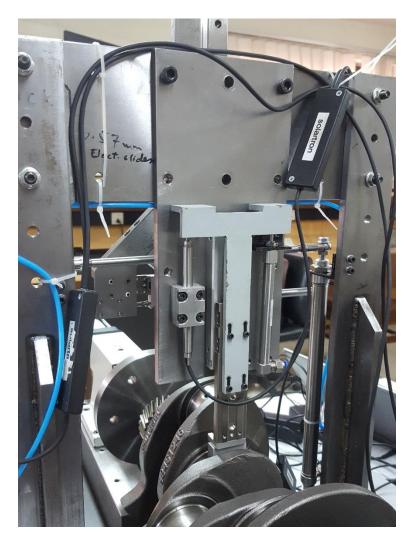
MANUFACTURED RUNOUT ASSEMBLY
